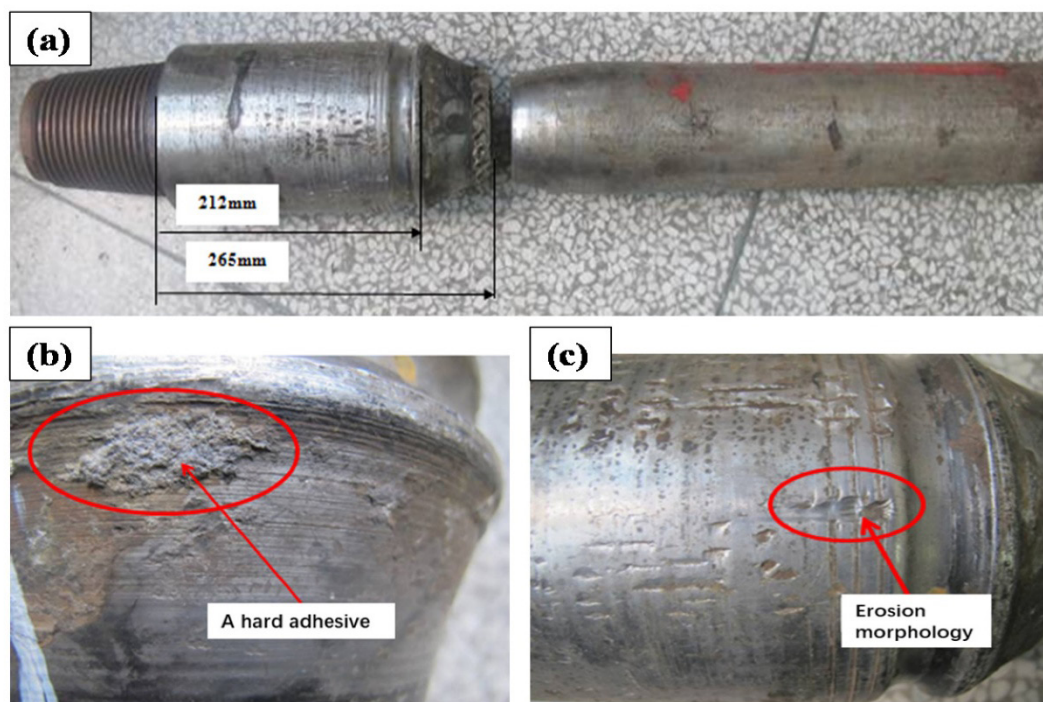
Failure Analysis of Drill Pipe during Working Process in a Deep...
